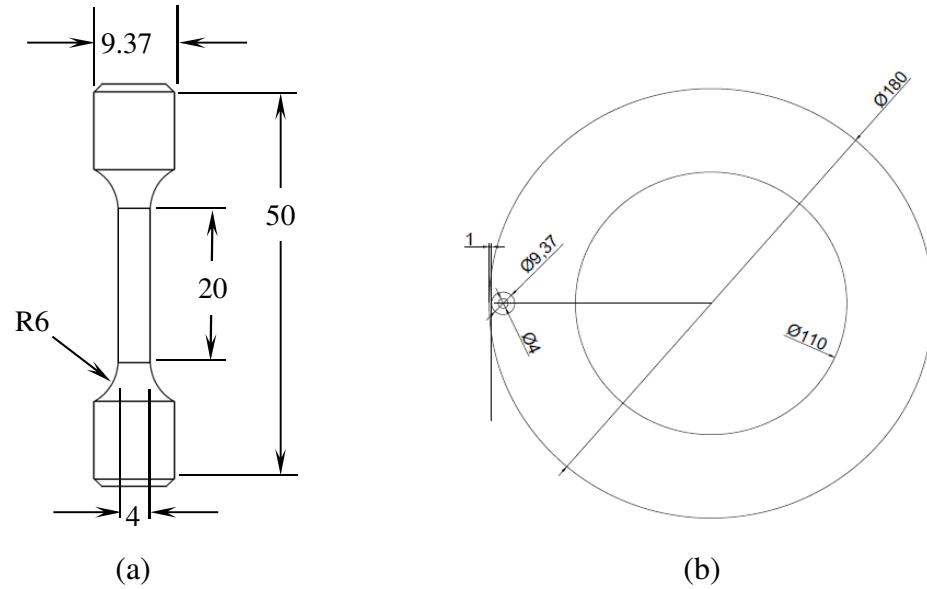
(a) Geometry and dimensions of tensile test specimen, and (b) cutting profile for obtaining a specimen blank from the MU-5 pipe (dimensions are in millimetres).
